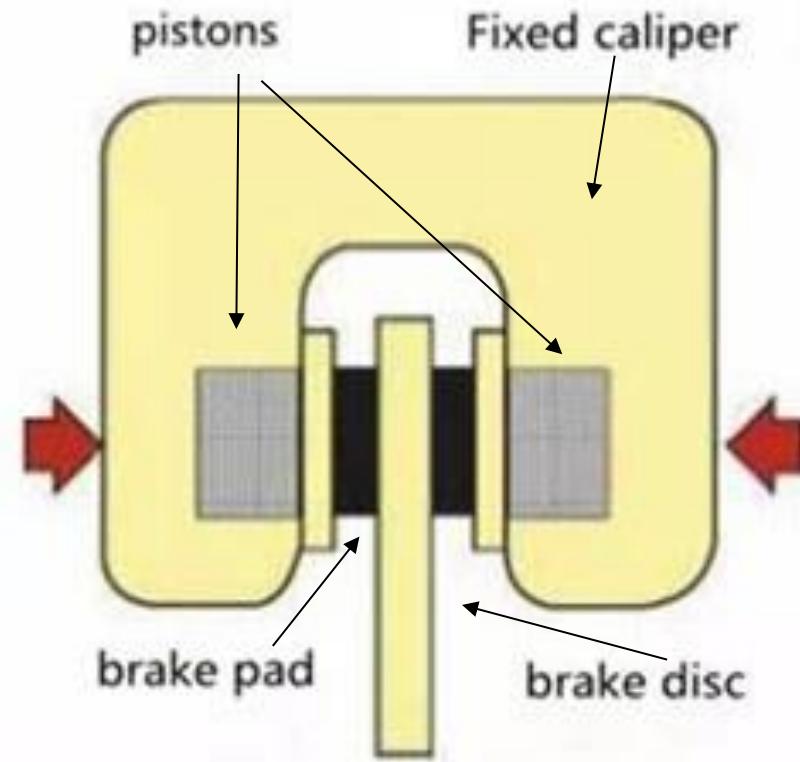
Caliper, Piston, and Brake Pad Configuration & Visualization.
